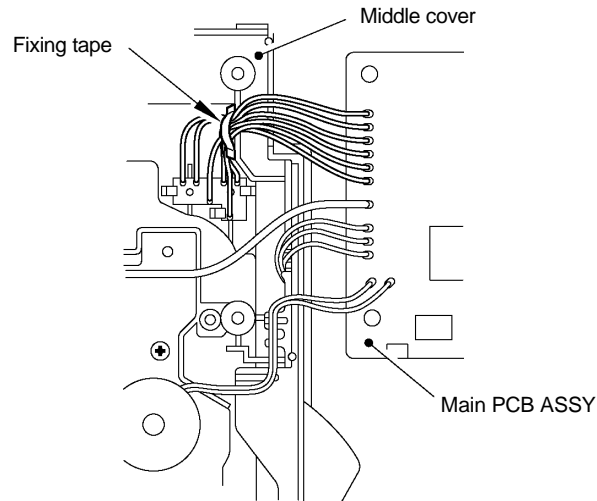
Assembling the Main PCB ASSY (4)
